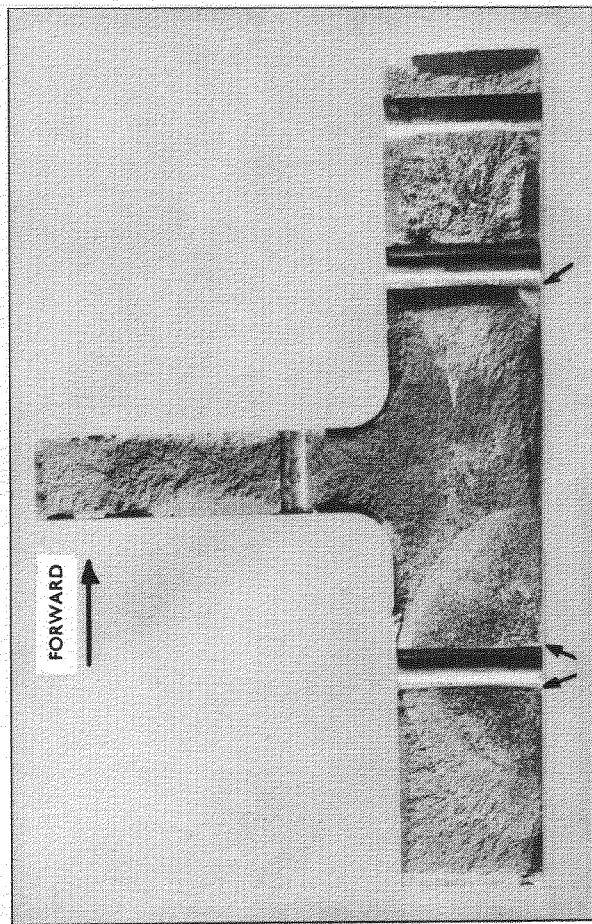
TENSION BOOM FRACTURE, PORT INNER WING, FIRST TEST
